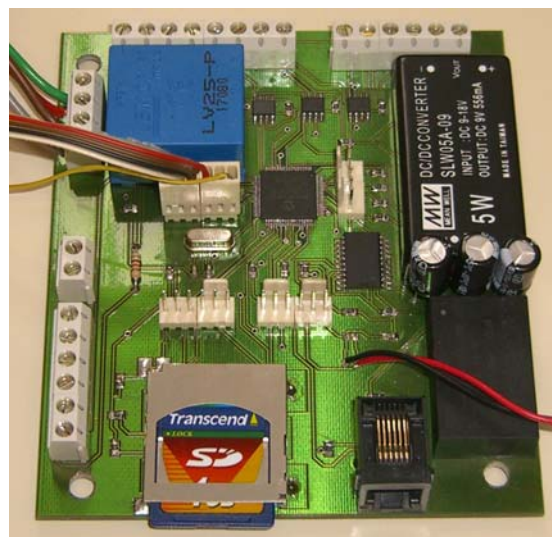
Photogram of the main printed circuit board. It contains the storage hardware (SD-Card), the PIC and RTC components, the DC/DC
